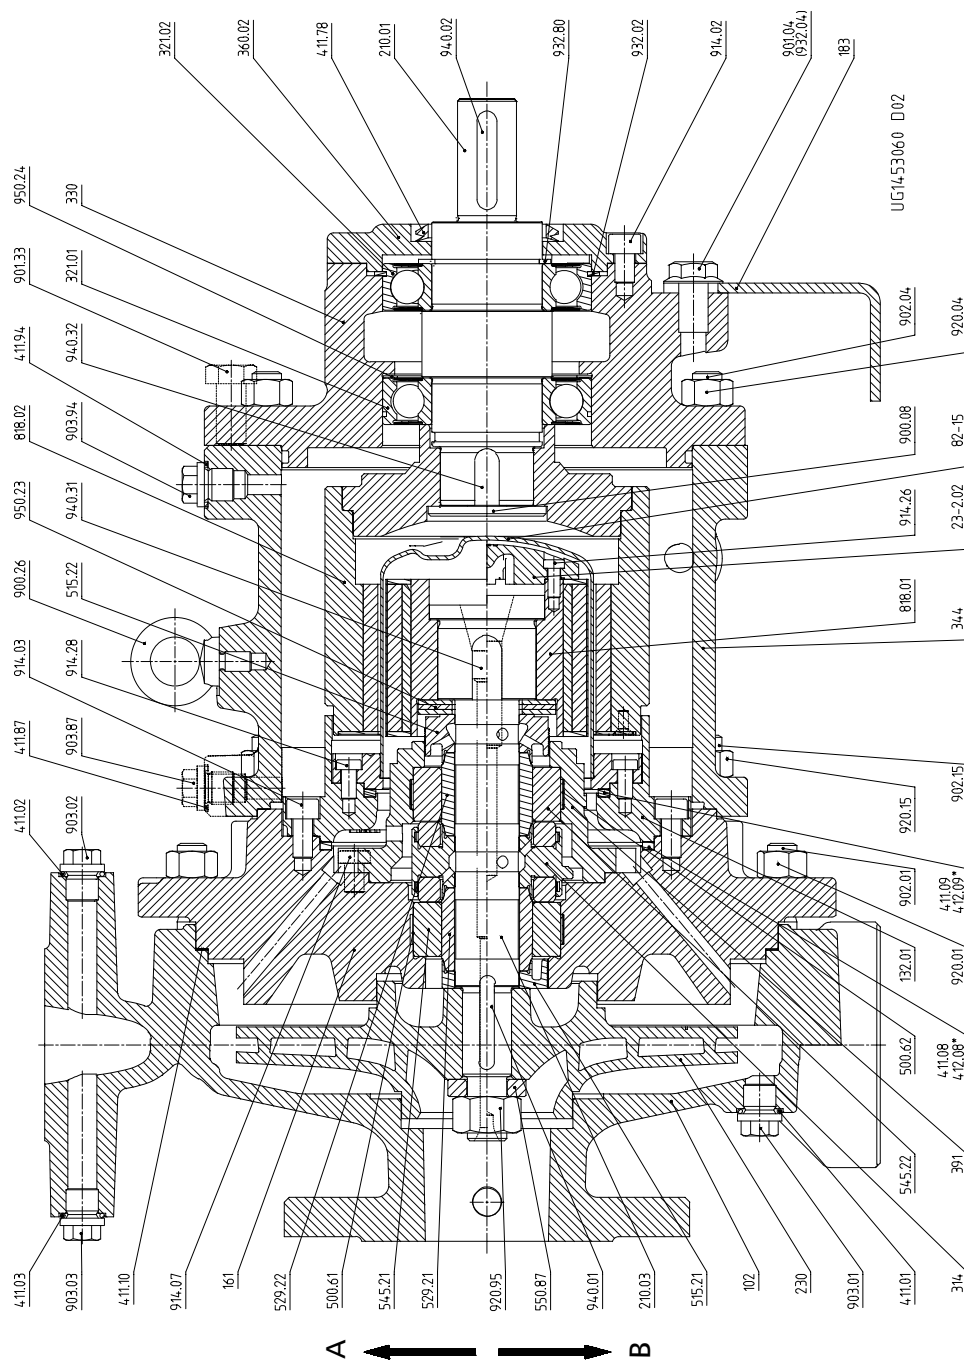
General assembly drawing of version with bolted cover, with intermediate piece
